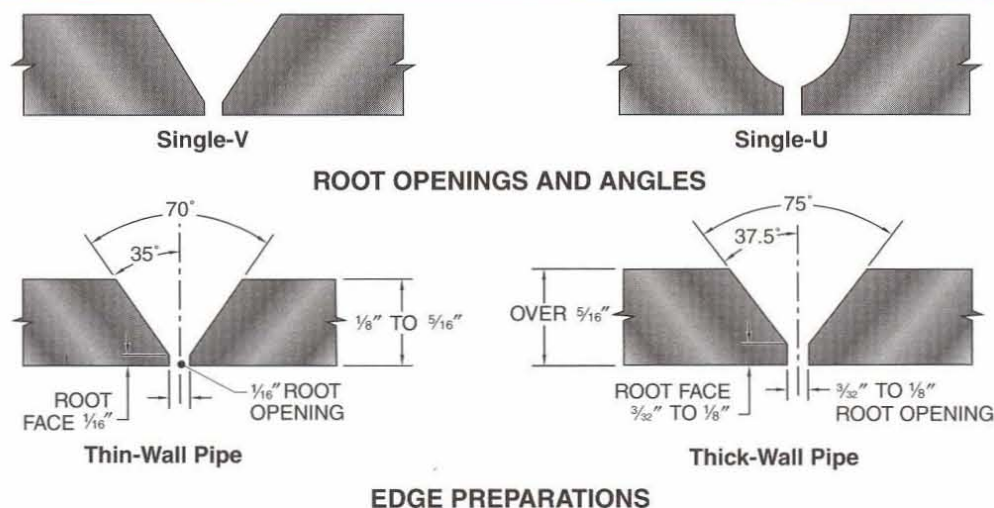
Welded joints may be made with butt-welded fittings or socket fittings.
